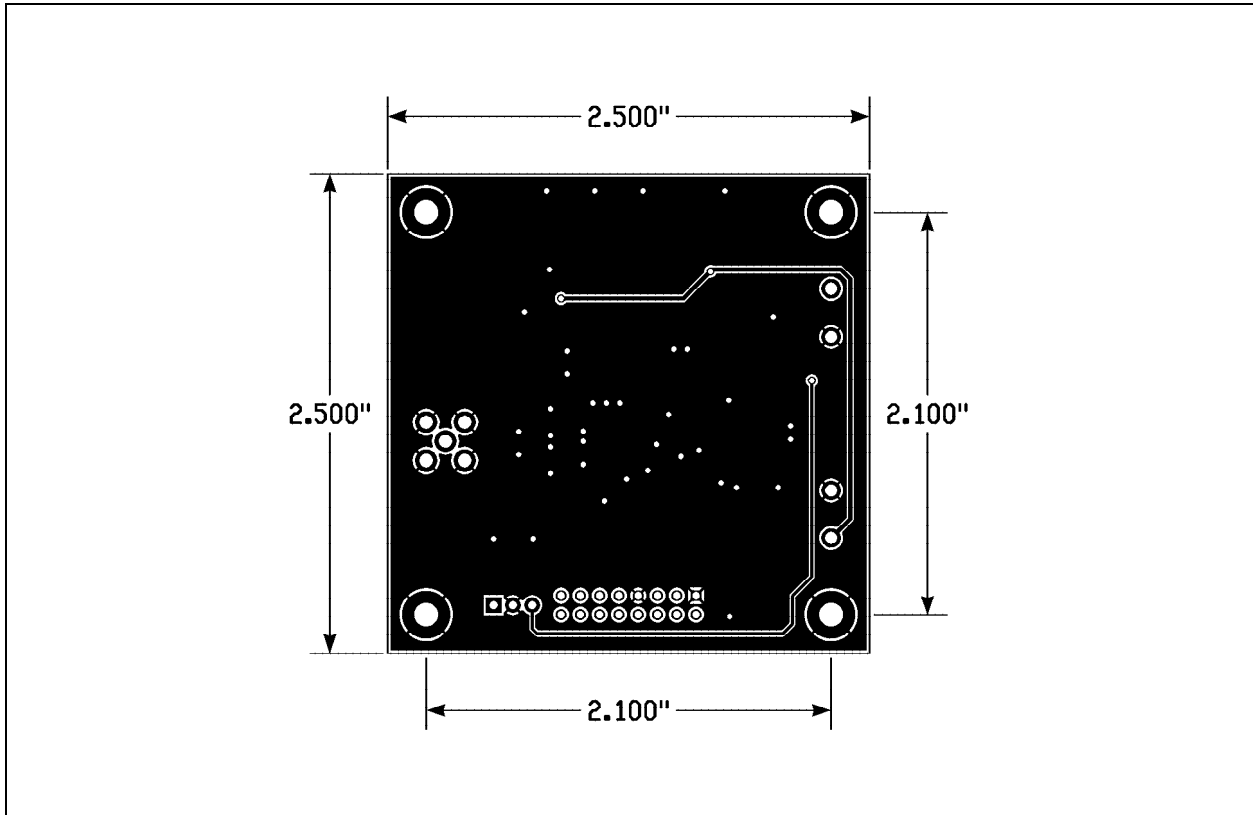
PCB LAYOUT - BOTTOM LAYER
